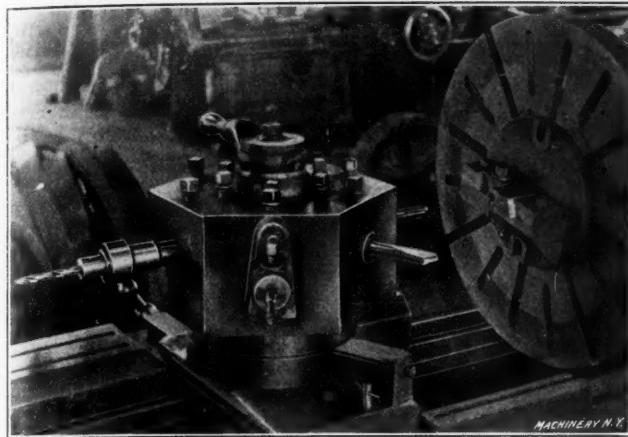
Screw Machine Chuck and Tools for Friction Slides
